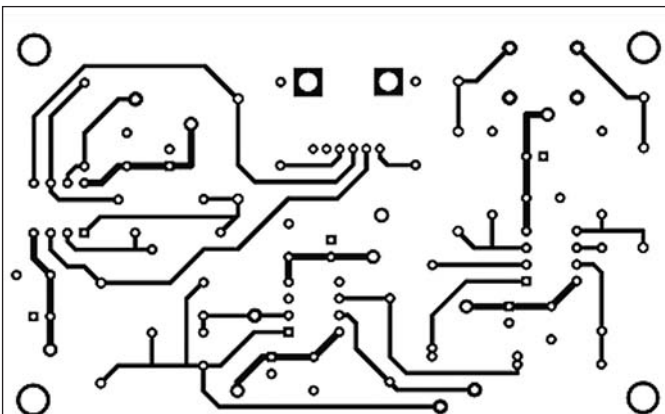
PCB #1 bottom copper layer (2.5" x 4.0").
